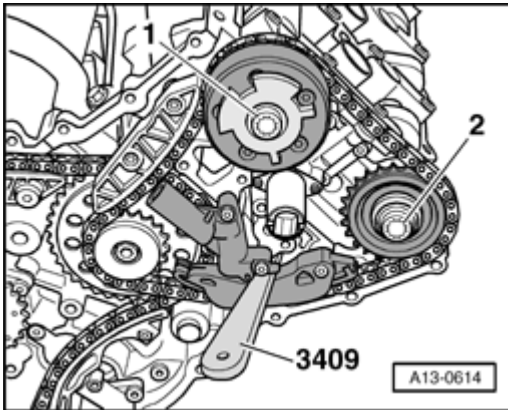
Tightening Camshaft Bolt On Exhaust Camshaft Of Right Cylinder Head To Initial Tightening Torque
